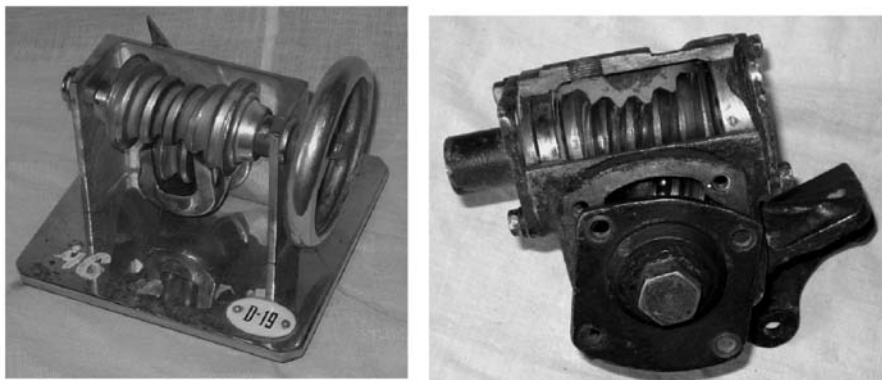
Models of steering gears with globoidal worm-roller engagement
